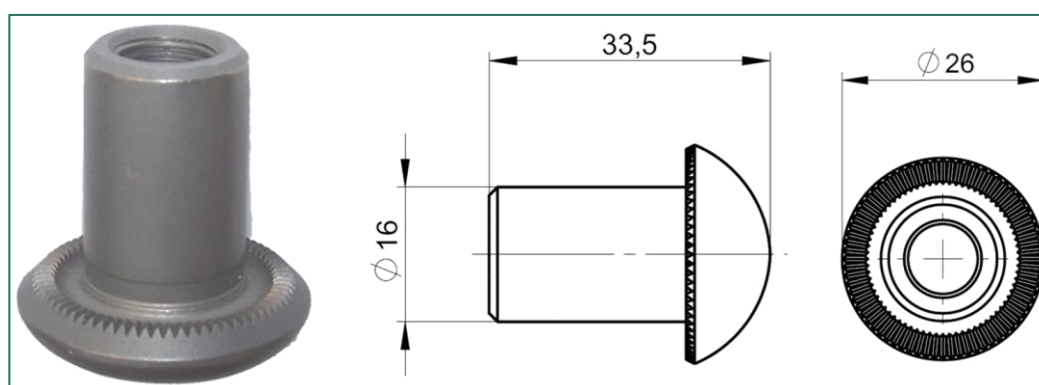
DIMENSIONS OF THE MUTARS® END PIECE
